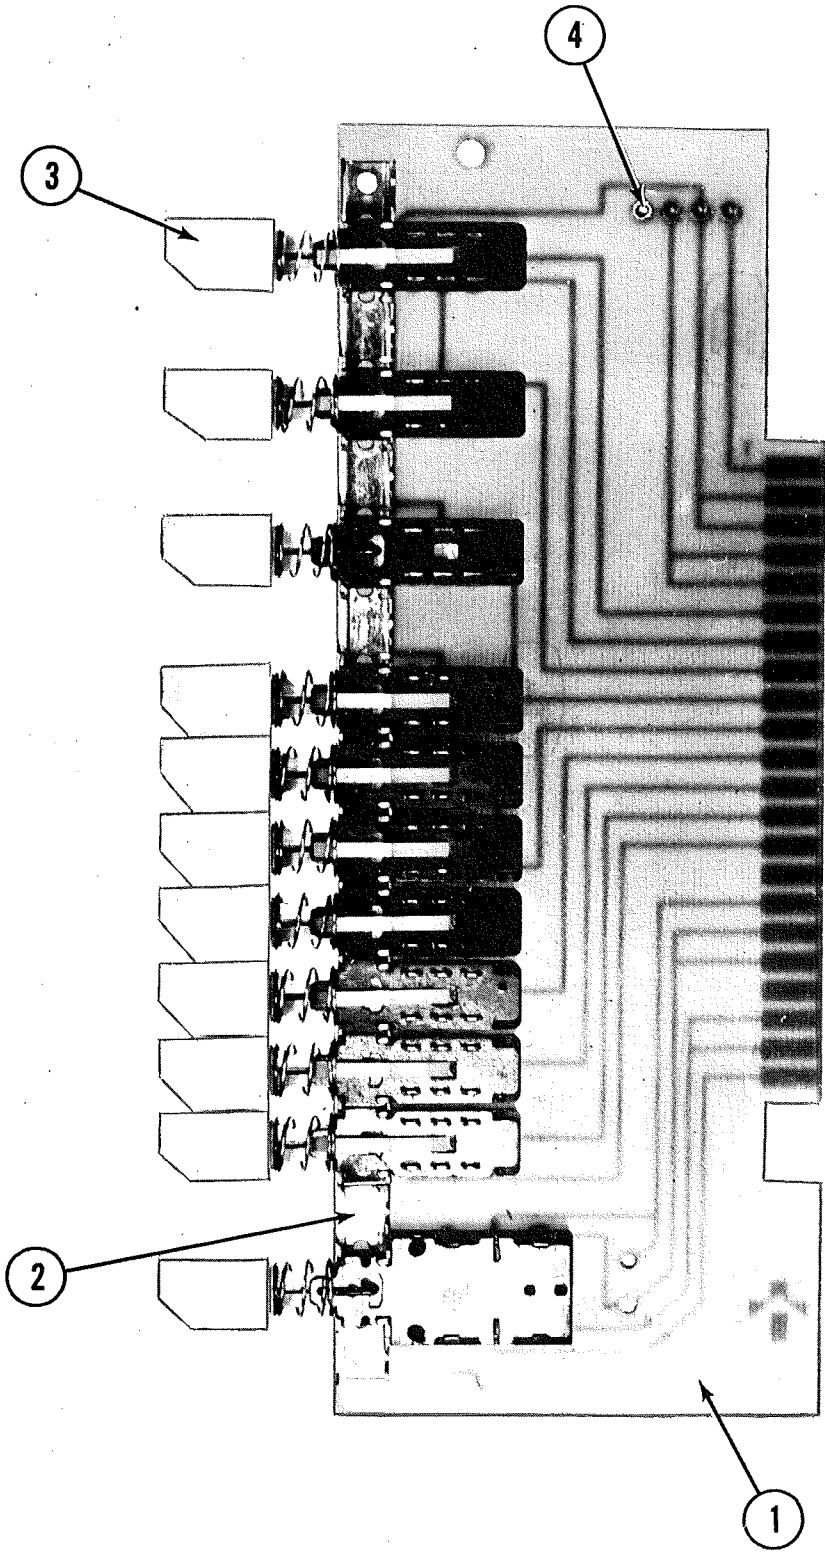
SWITCH BOARD ASSEMBLY
